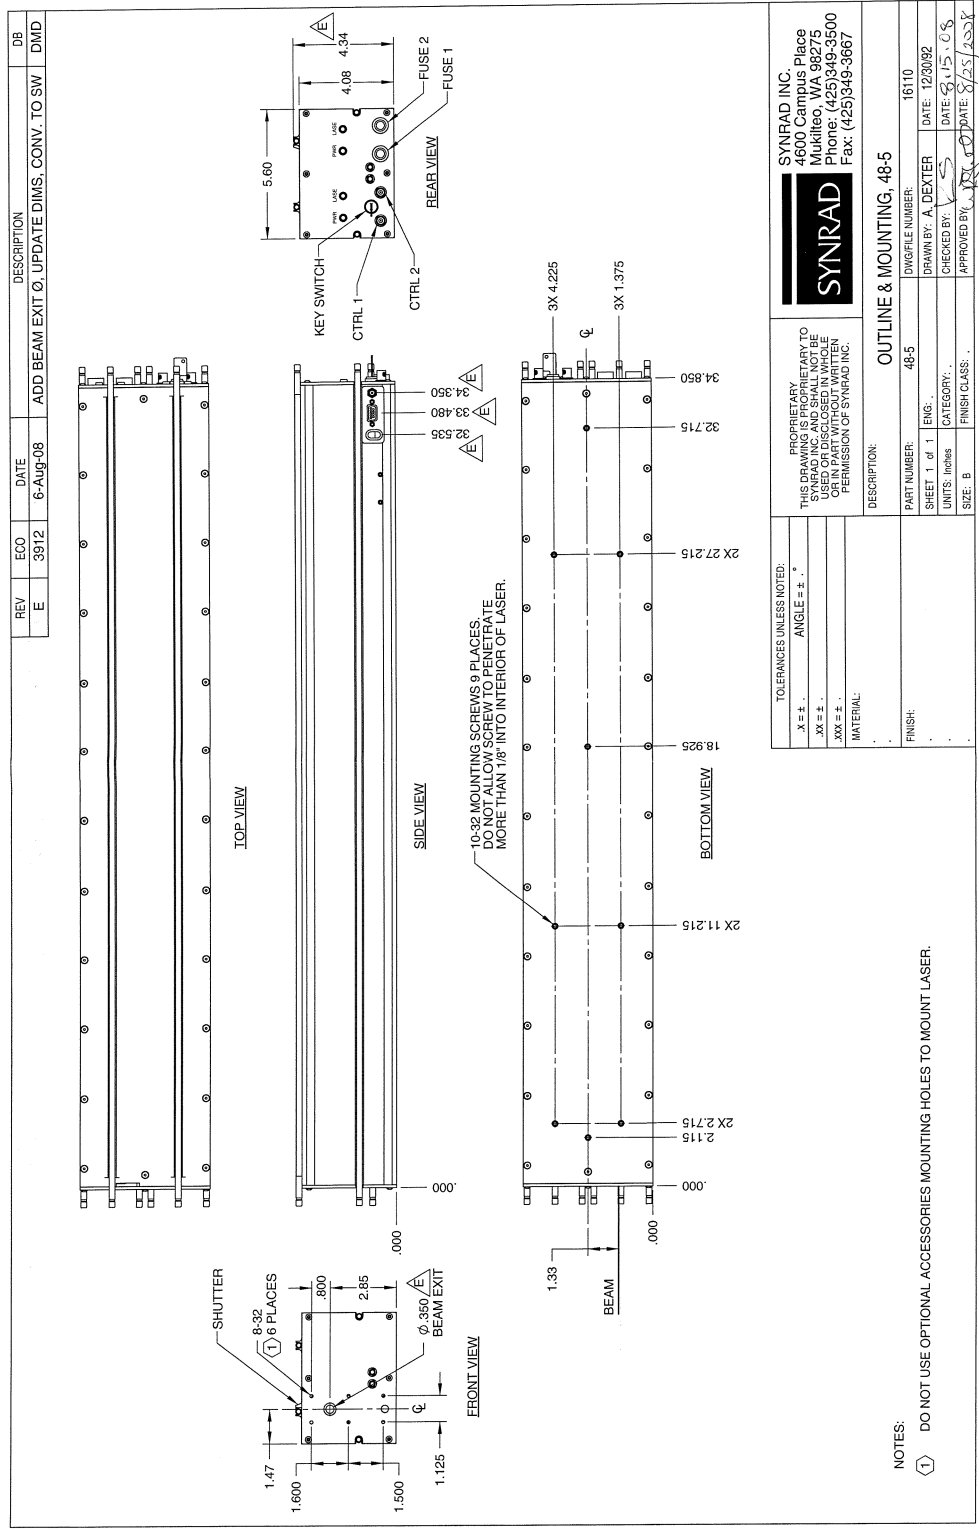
Model 48-5 package outline and mounting dimensions.
